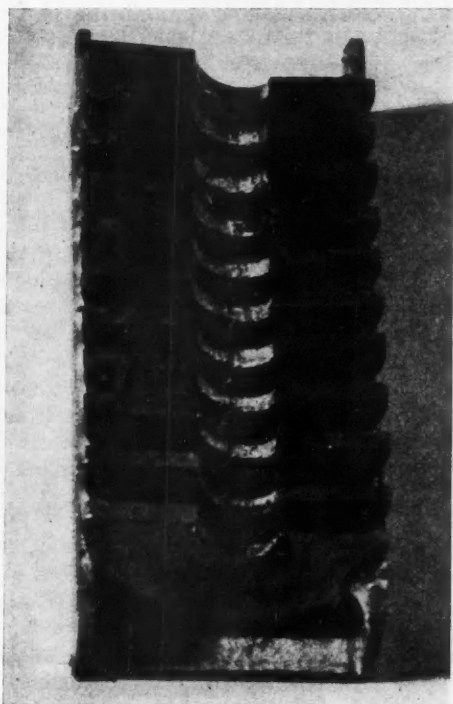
This photograph gives a view of a coil which has failed at relatively low fields. The failure is probably due to a tool mark on the inner diameter. Careful surface preparation of the coil after heat treatment gives an improvement in the lifetime.
